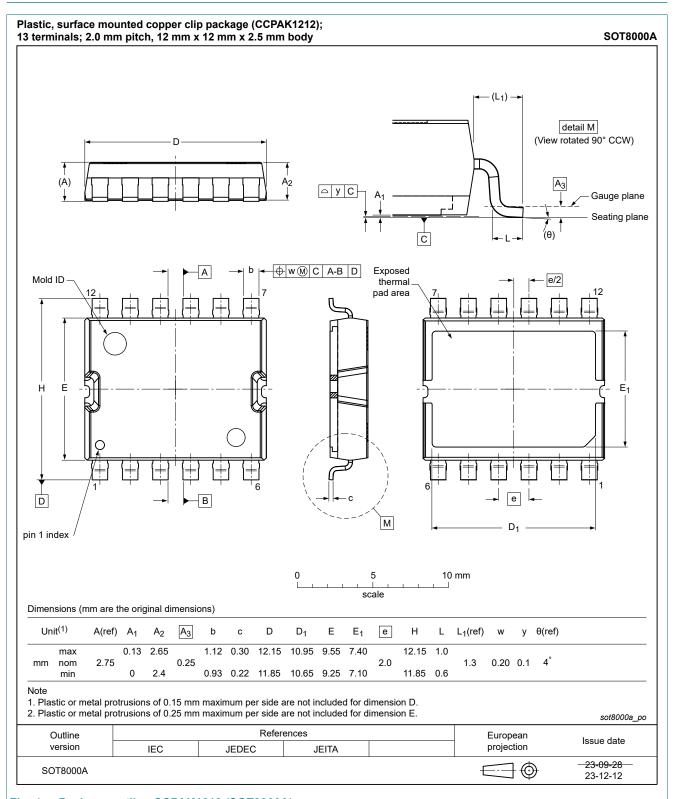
Package outline CCPAK1212 (SOT8000A)
